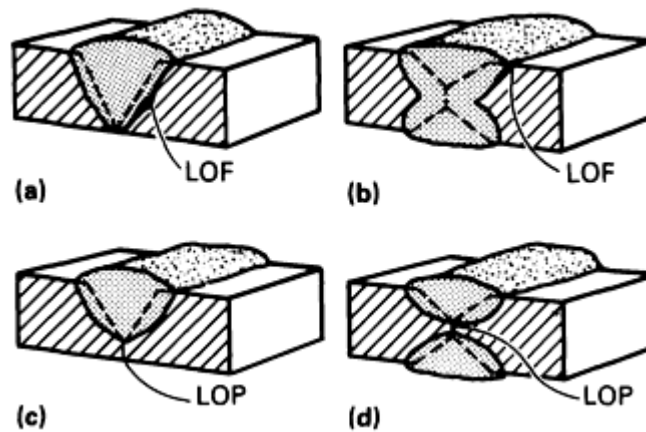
LACK OF FUSION IN (A) A SINGLE-V-GROOVE WELD AND (B) DOUBLE-V-GROOVE WELD. LACK OF PENETRATION IN (C) A SINGLE-V-GROOVE WELD AND (D) A DOUBLE-V-GROOVE WELD
